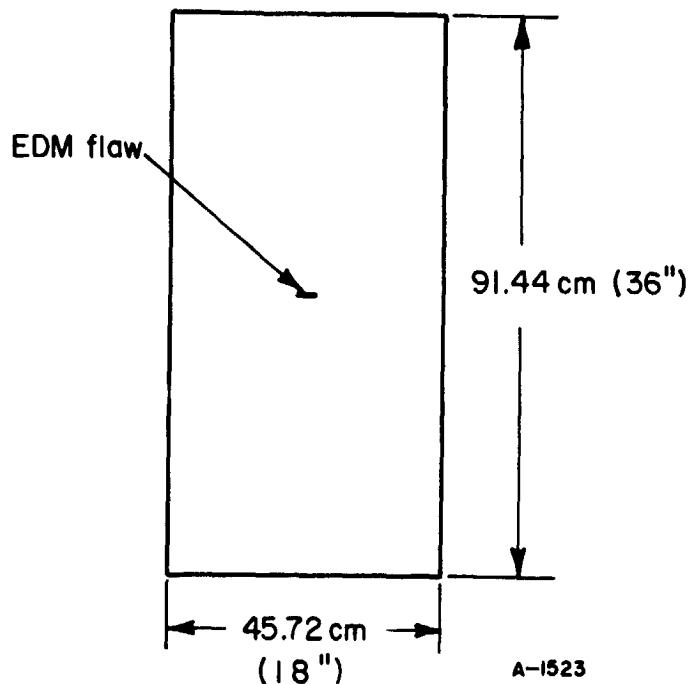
CENTER-CRACKED SHEET FRACTURE TOUGHNESS SPECIMEN
